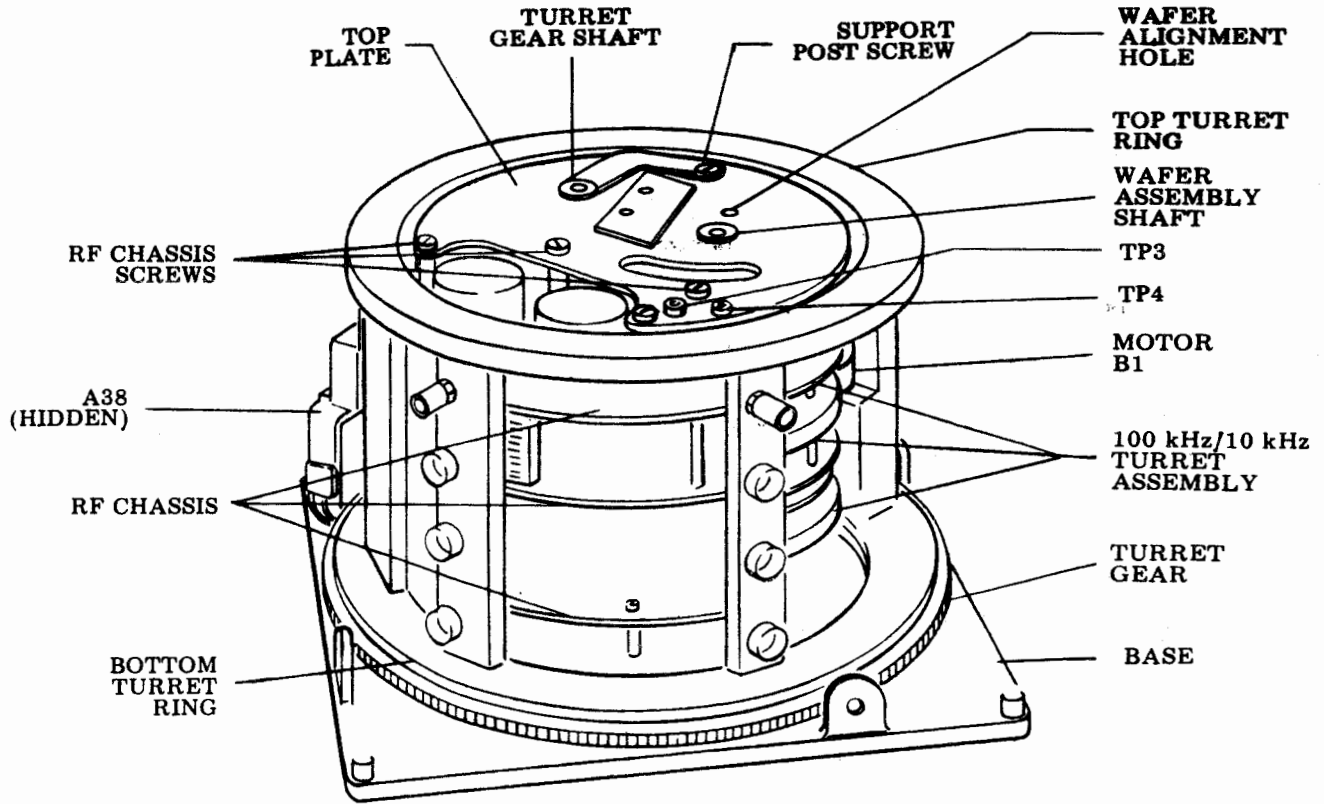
RF Amplifier Assembly A2A4, Disassembly Parts Identification
